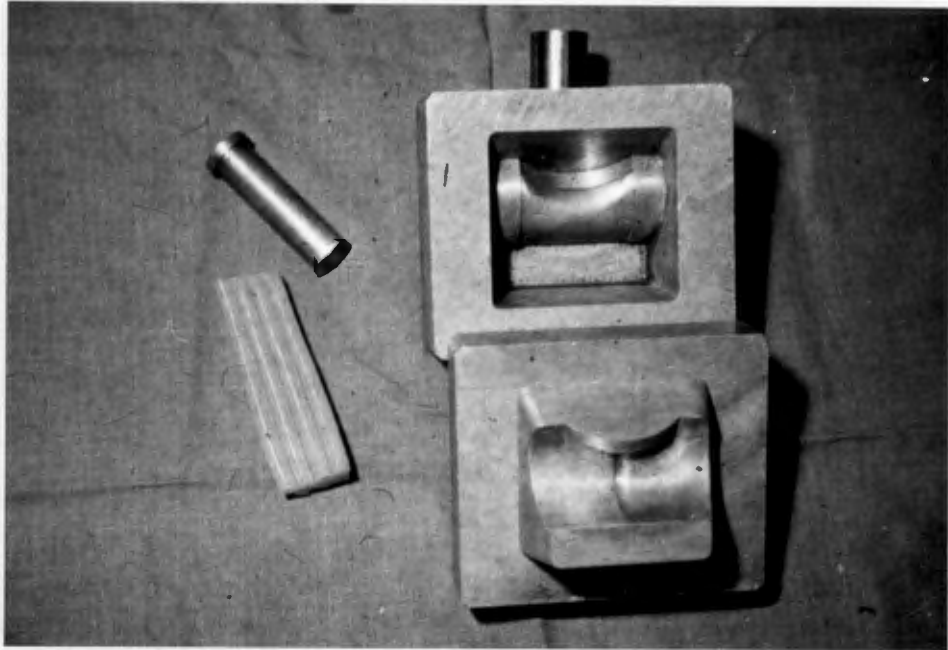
The metal mould and syringe used for the manufacture of Silastic Valve 11, together with a specimen of raw Silastic.
